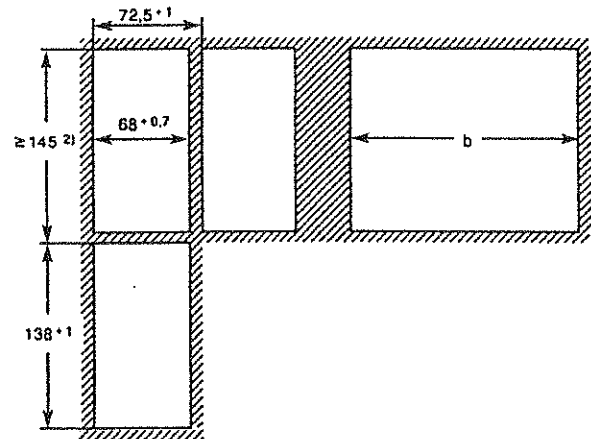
/11 SIPART DR21 controller, dimensions in mm
